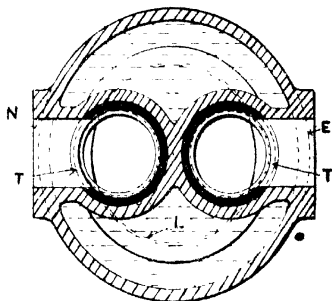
Sectional plan of cylinder head in vertical motor, showing arrangement of admission and exhaust valves directly over piston.
